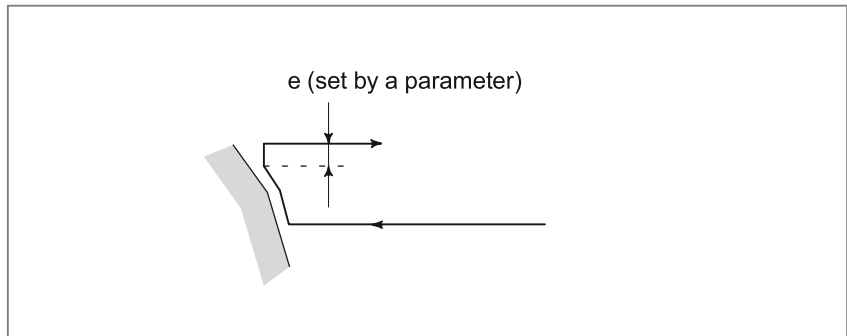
(c) Figure which cannot be machined in stock removal in turning (Type II)
